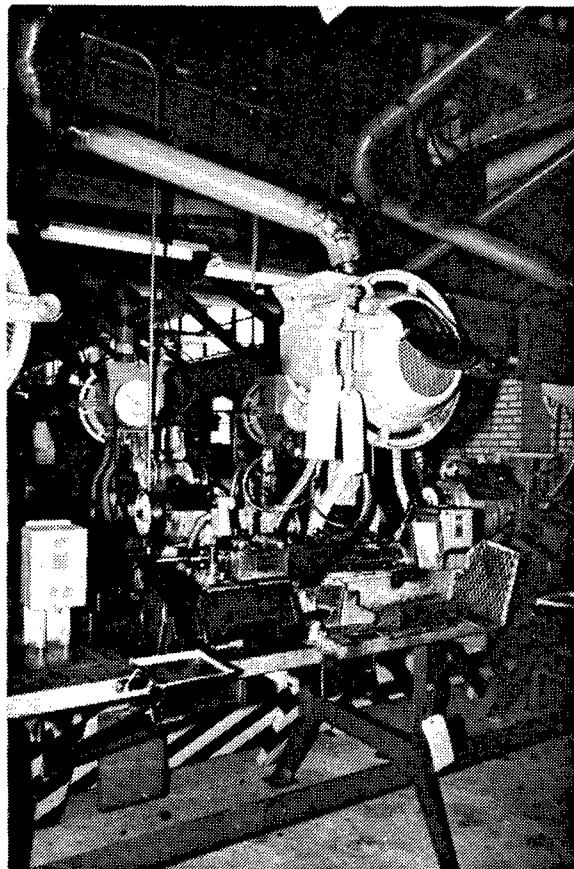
Building 102: Tracer Trim Machine manufactured in 1952 by the Fidelity Machine Company, Incorporated.
